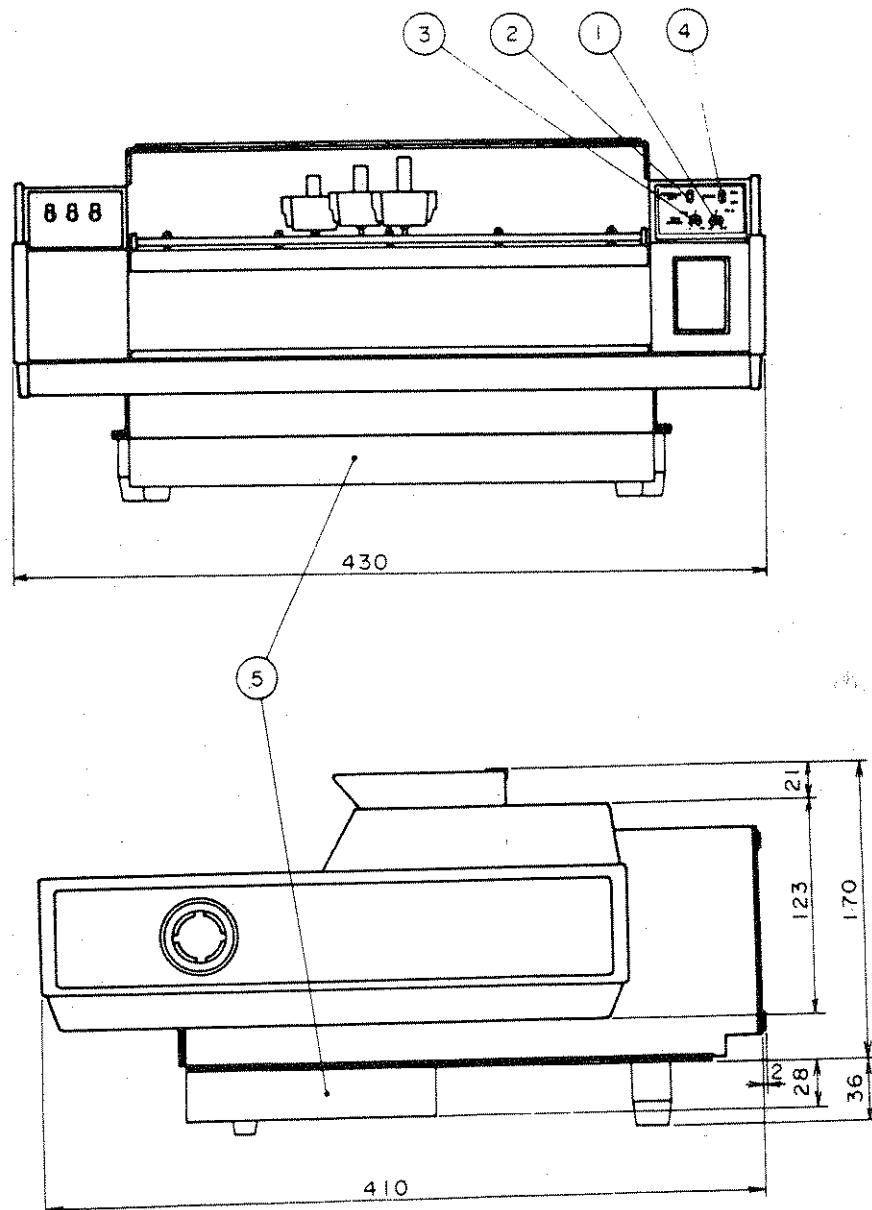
External View of Model 1243 with OPTION 11 Synchronizer
